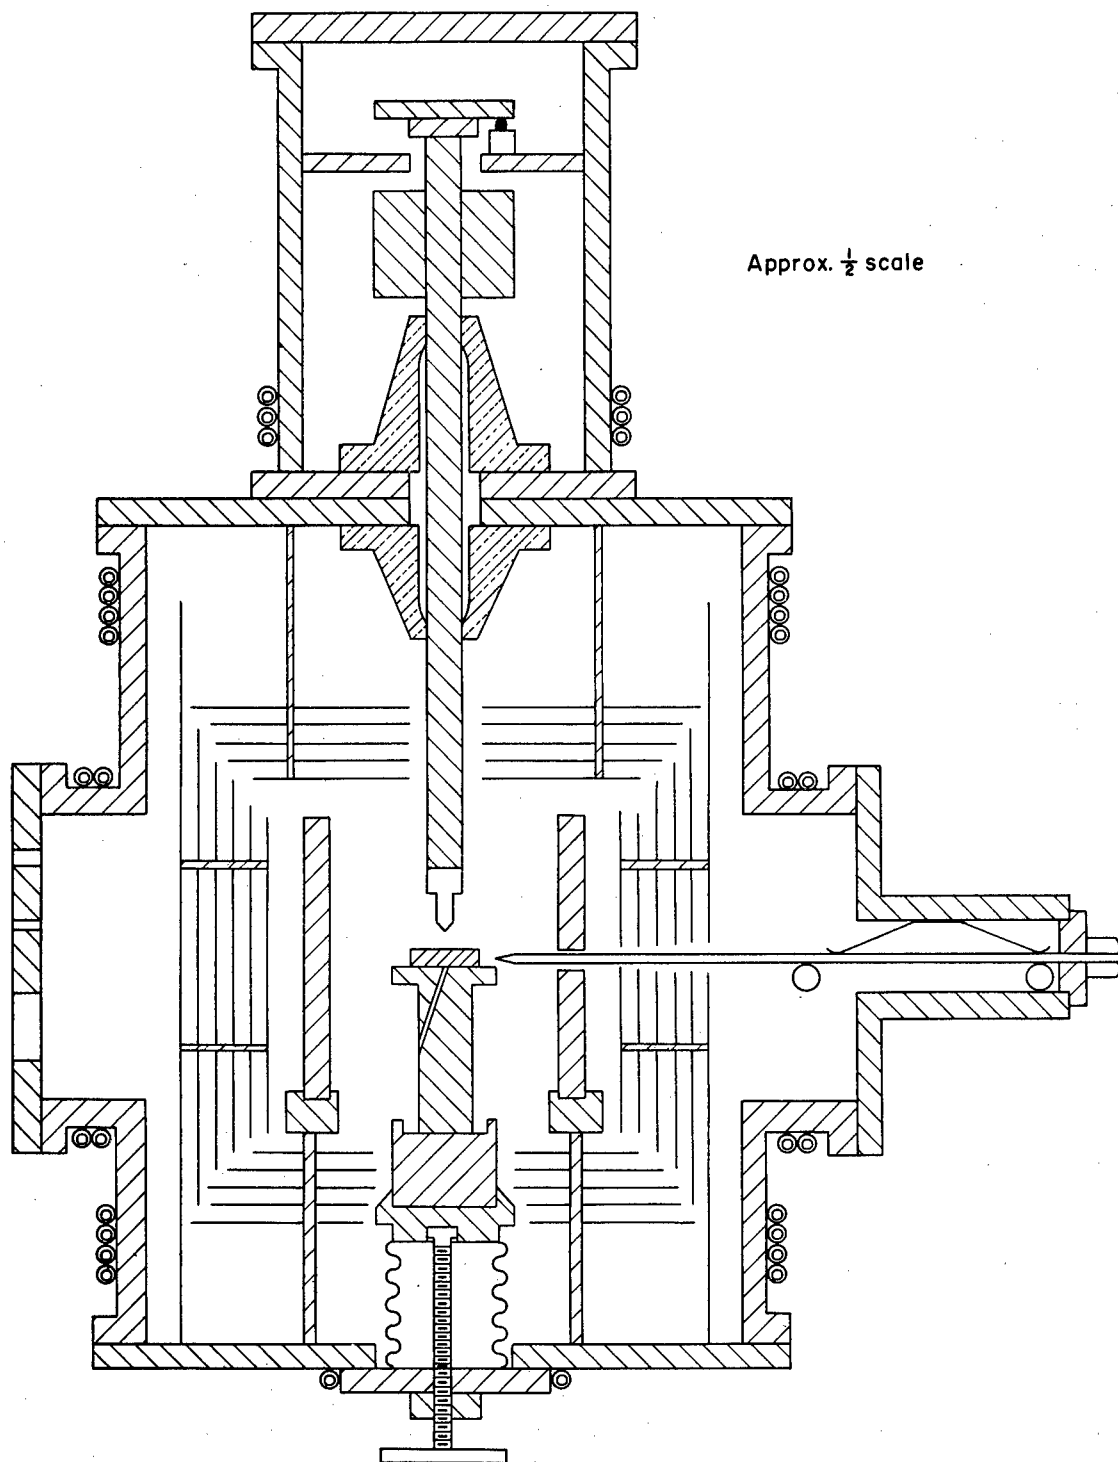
VACUUM HOT-HARDNESS MACHINE
